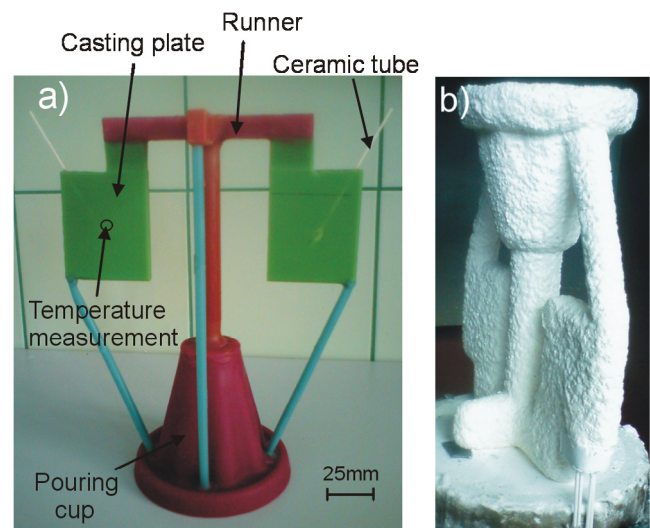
Wax assembly with schematically marked area of temperature measurement (a) and the ceramic shell mold placed in the furnace with mounted thermocouples (b).
